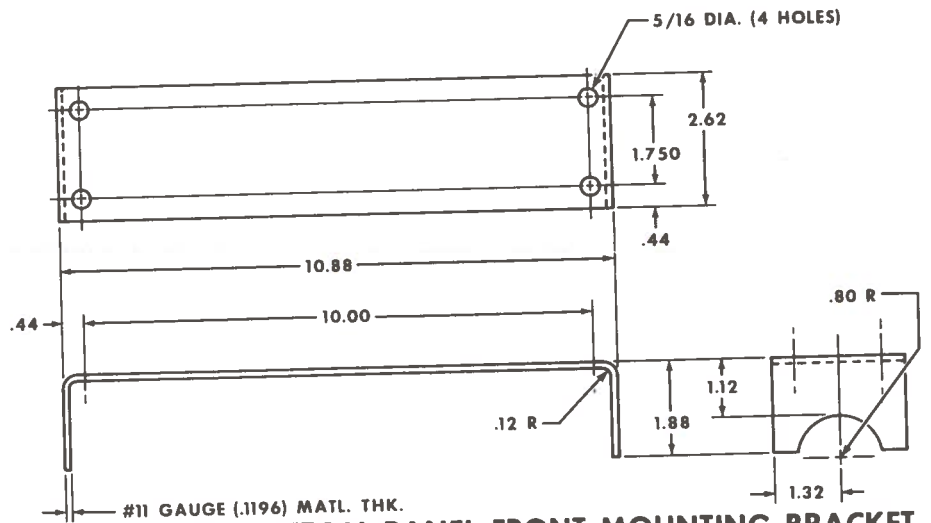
BOTTOM PANEL FRONT MOUNTING BRACKET
